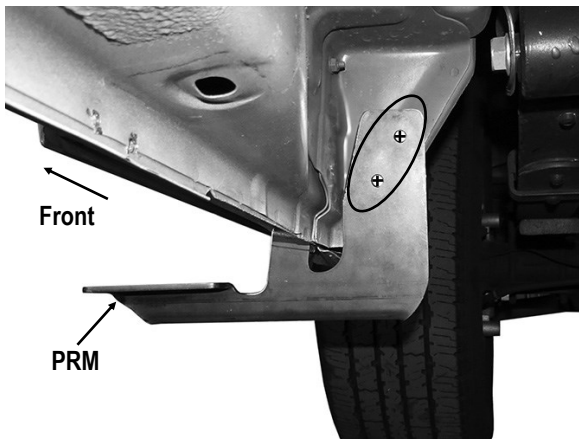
Step Bar Installed on Bracket Installed (Example)
